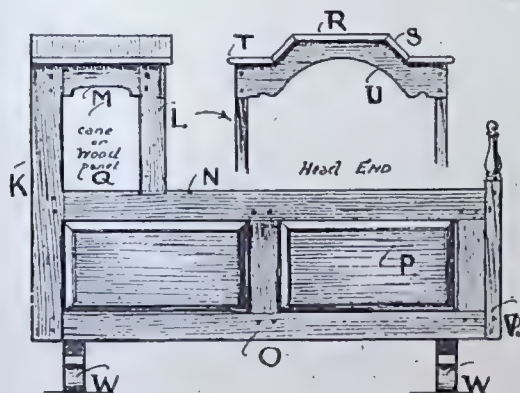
ALTERNATIVE DESIGN FOR CRADLE, WITH PANELLED SIDES, AND FINISHED SQUARE INSTEAD OF TAPERED.
